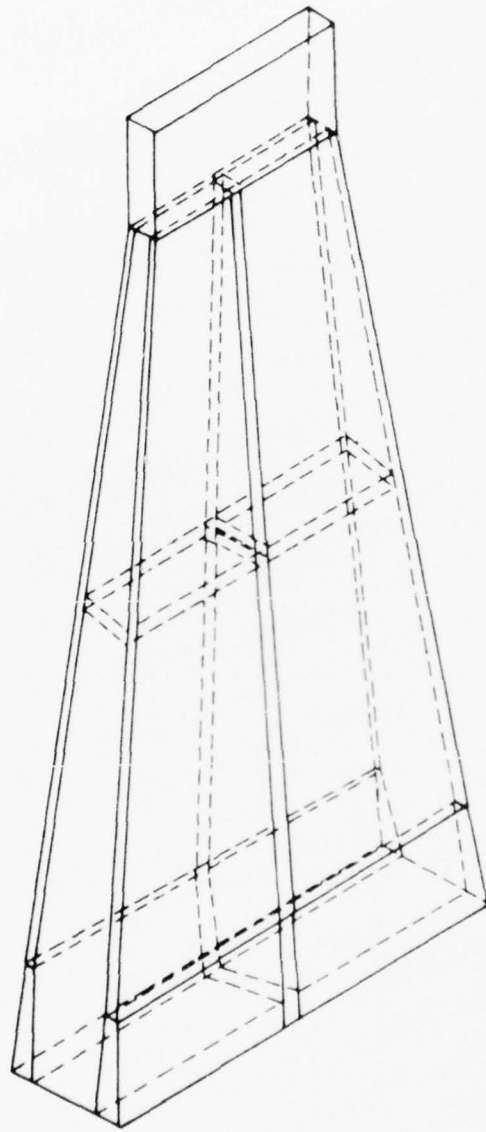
Box-Beam Design with Continuous Single-Sided T-Welds
